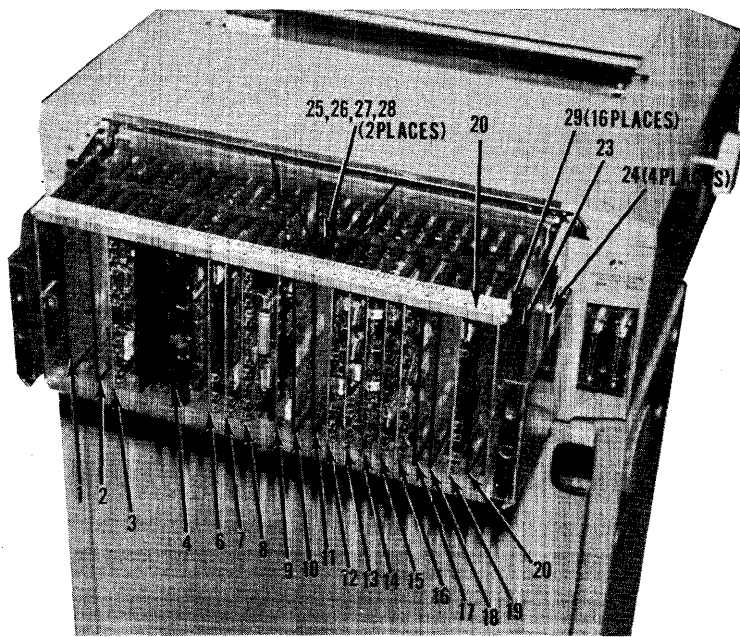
Typical Bustle Assembly for TermiNet 300 D Printer
